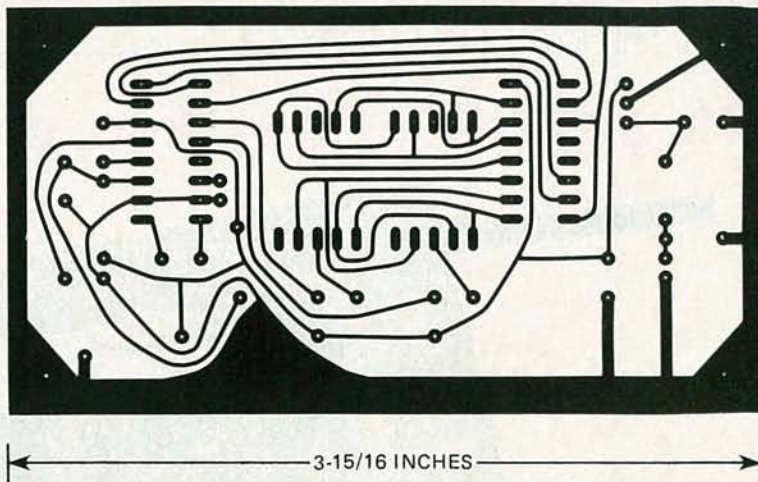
FULL-SIZE FOIL PATTERN for etching the printed-circuit board. See the Parts List for a supplier of ready-to-use boards.
